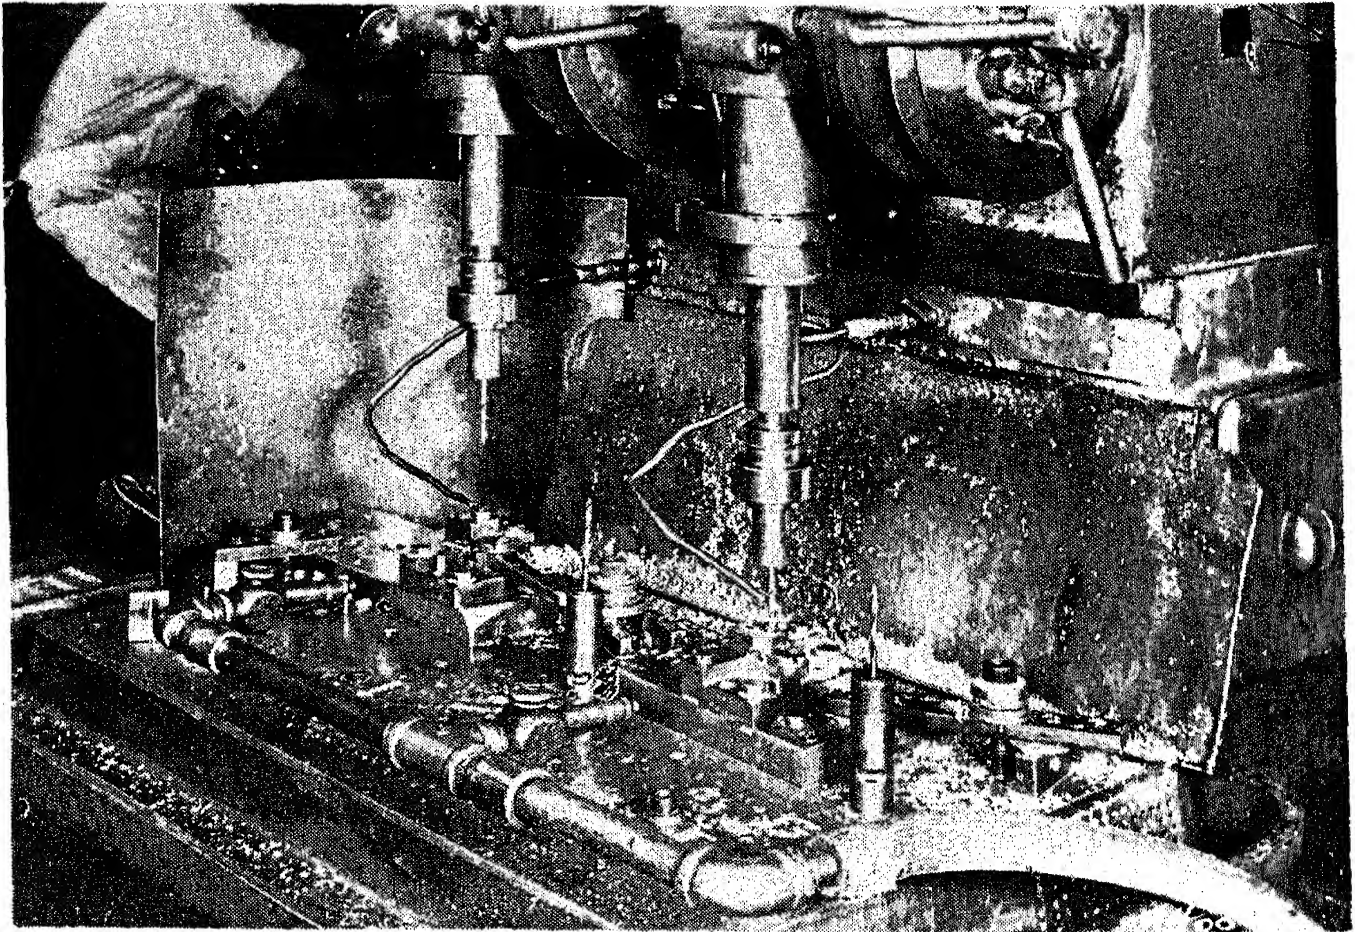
A production job installed on a two spindle gang drill press. A jig is clamped to the table by strap clamps under each spindle. Magic quick change chucks are mounted on the spindles, and the tools are held in quick change collets. An air line is arranged with a nozzle for blowing the chips away from each jig. (Courtesy Consolidated Machine Tool Corp.)
